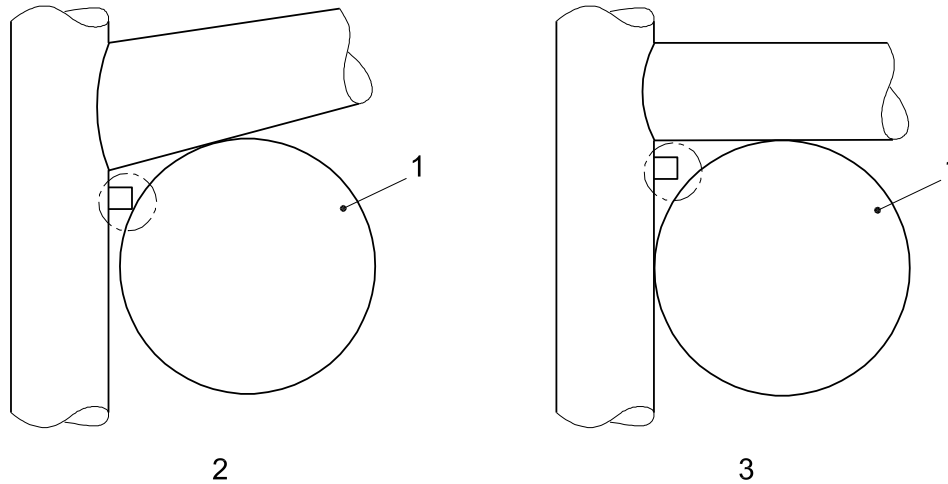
Examples of minimum dimensions of exposed protrusion
